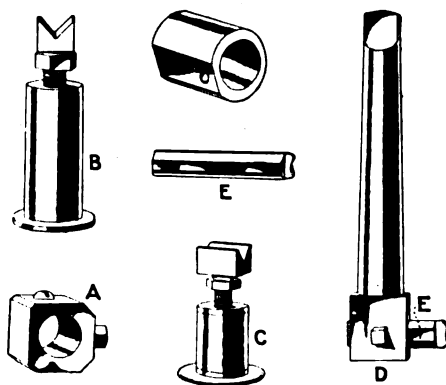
AXLE DRILLING AND SPLINING TOOL
